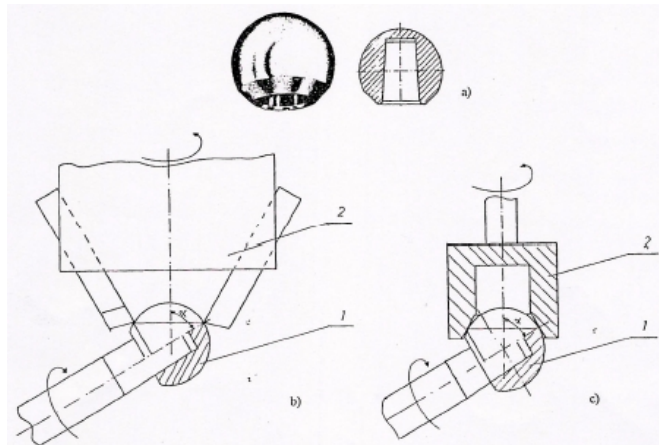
Scheme of processing sphere (a); milling (b); by grinding (c)
